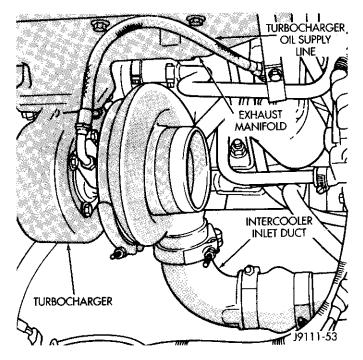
Oil Supply Line and Intercooler Inlet Duct
